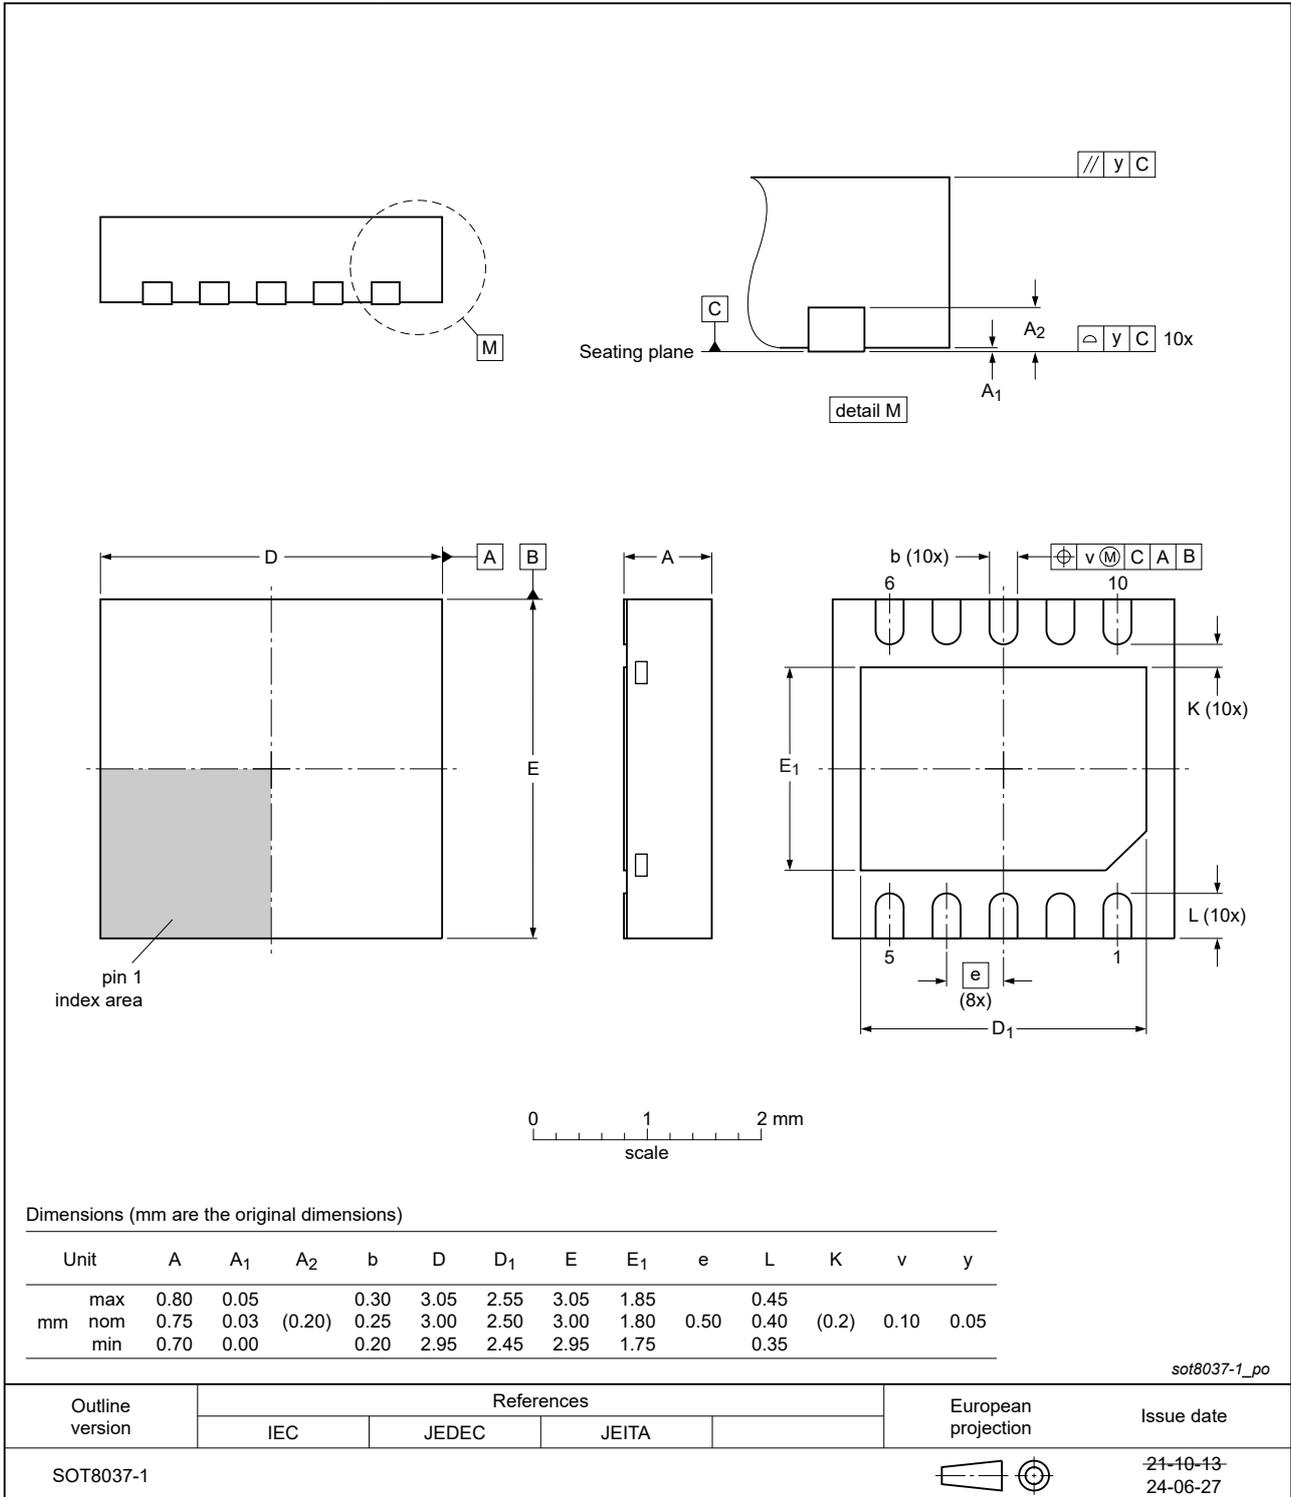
Package outline SOT8037-1 (DFN3030-10)
